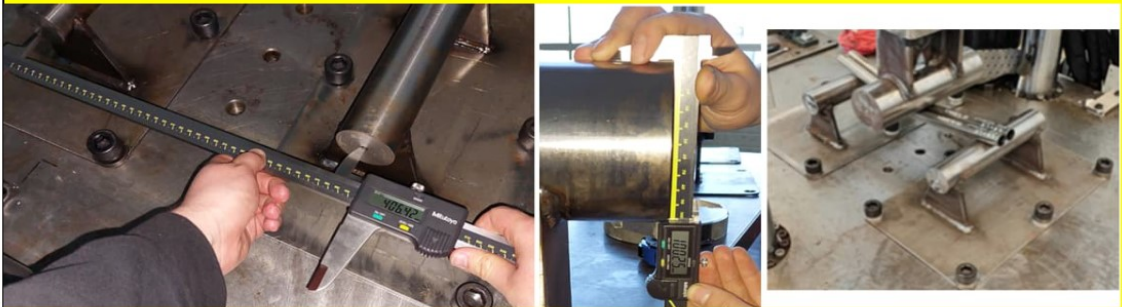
Test setup - Steel tubes as required for baseline design (T3.2)
